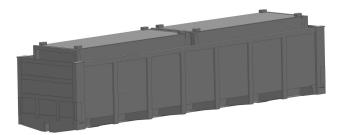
Spatial model of the supporting structure of an open wagon loaded with containers, taking into account the new scheme of their fastening
